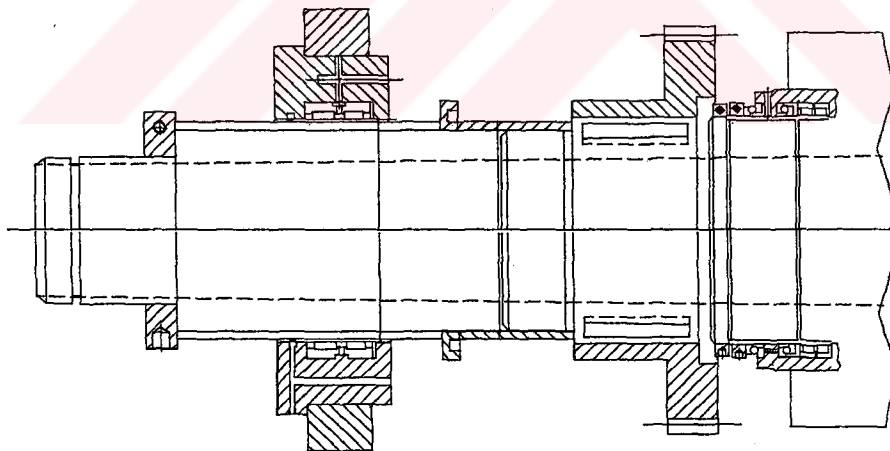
A lathe spindle with thrust and ball bearing arrangement [57]
